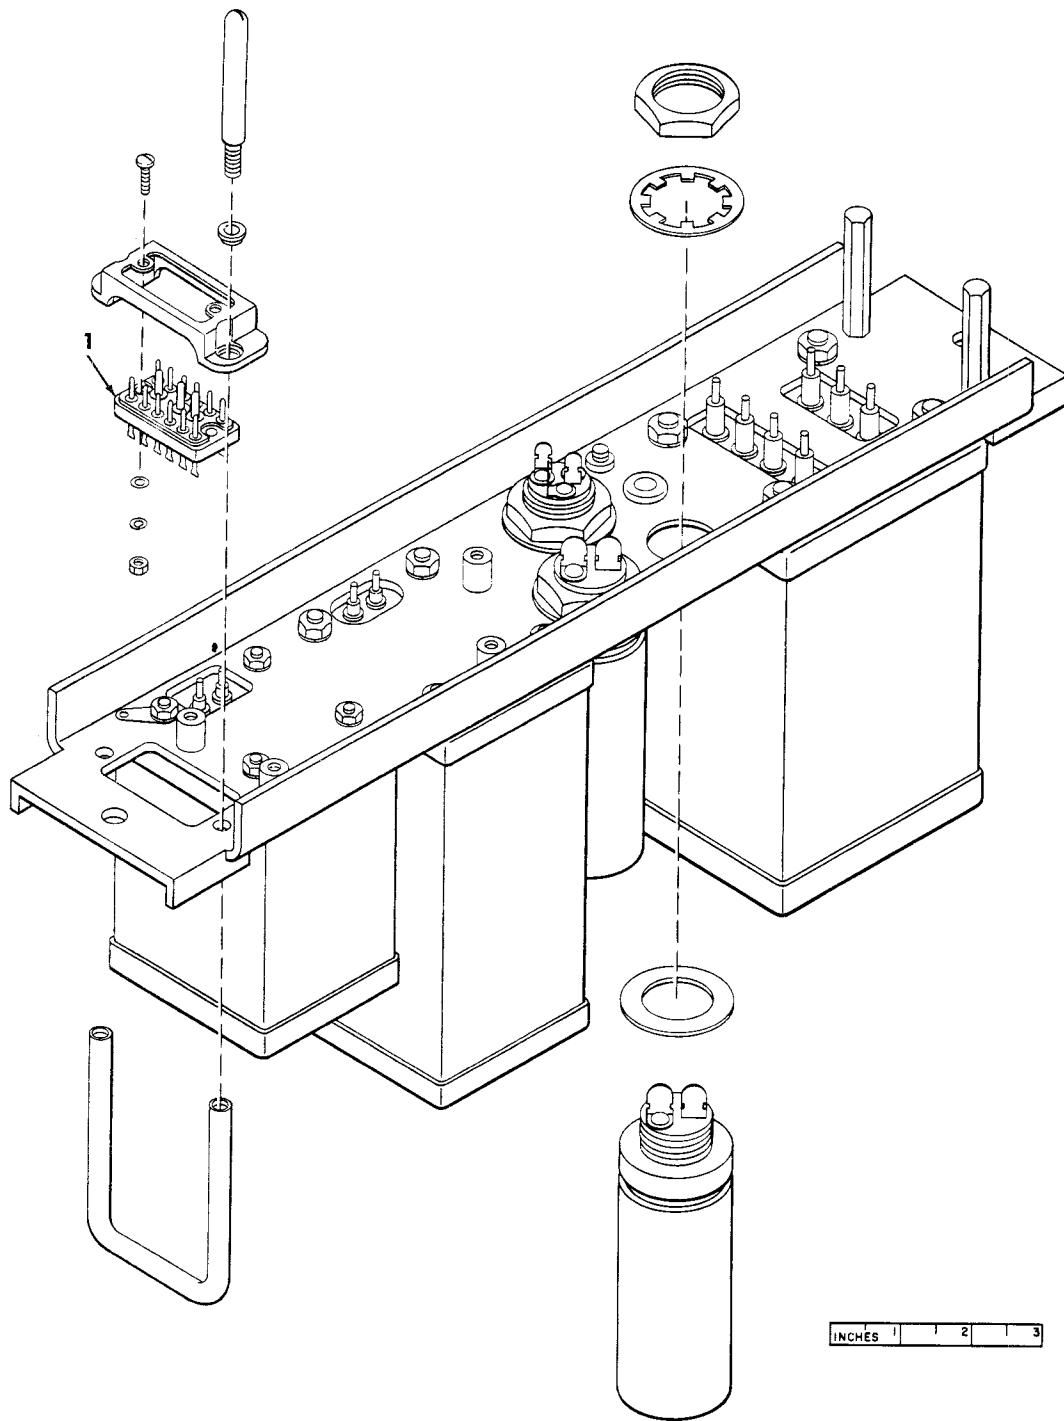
Regulator, voltage CN-280/M (9137641)—partial exploded view
